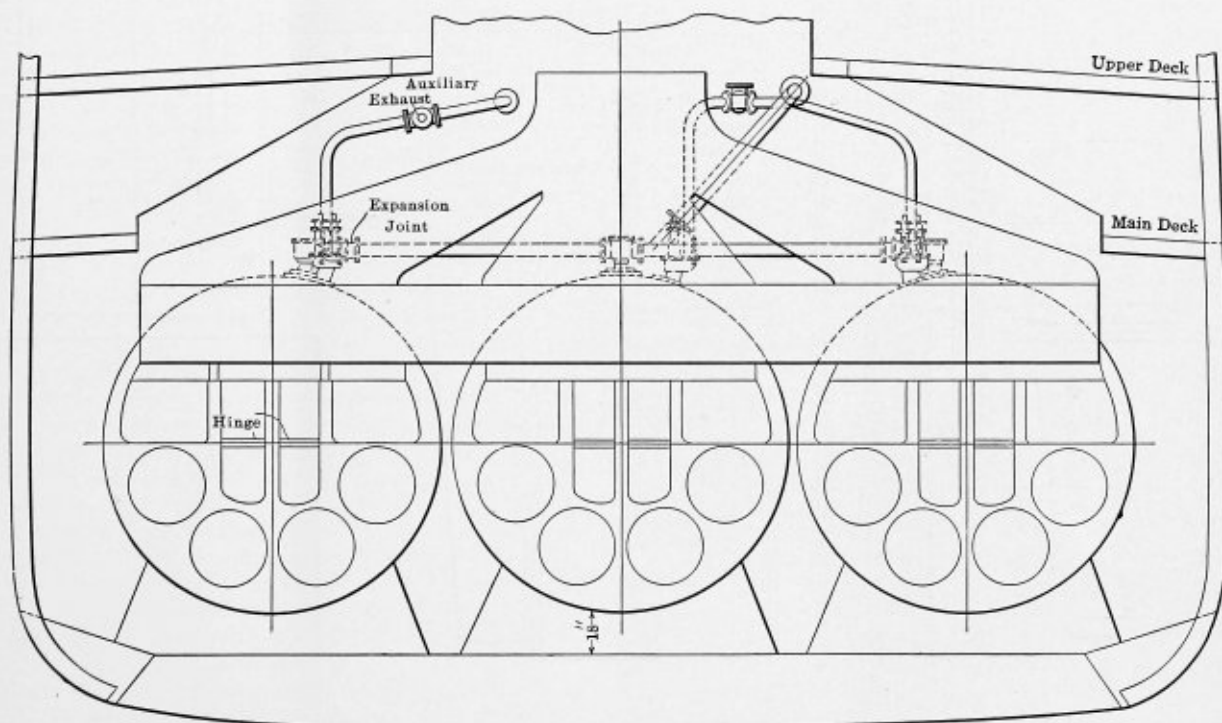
CROSS SECTION THROUGH BOILER ROOM OF STEAMSHIP, SHOWING ARRANGEMENT OF BOILERS, UPTAKES AND PIPING
